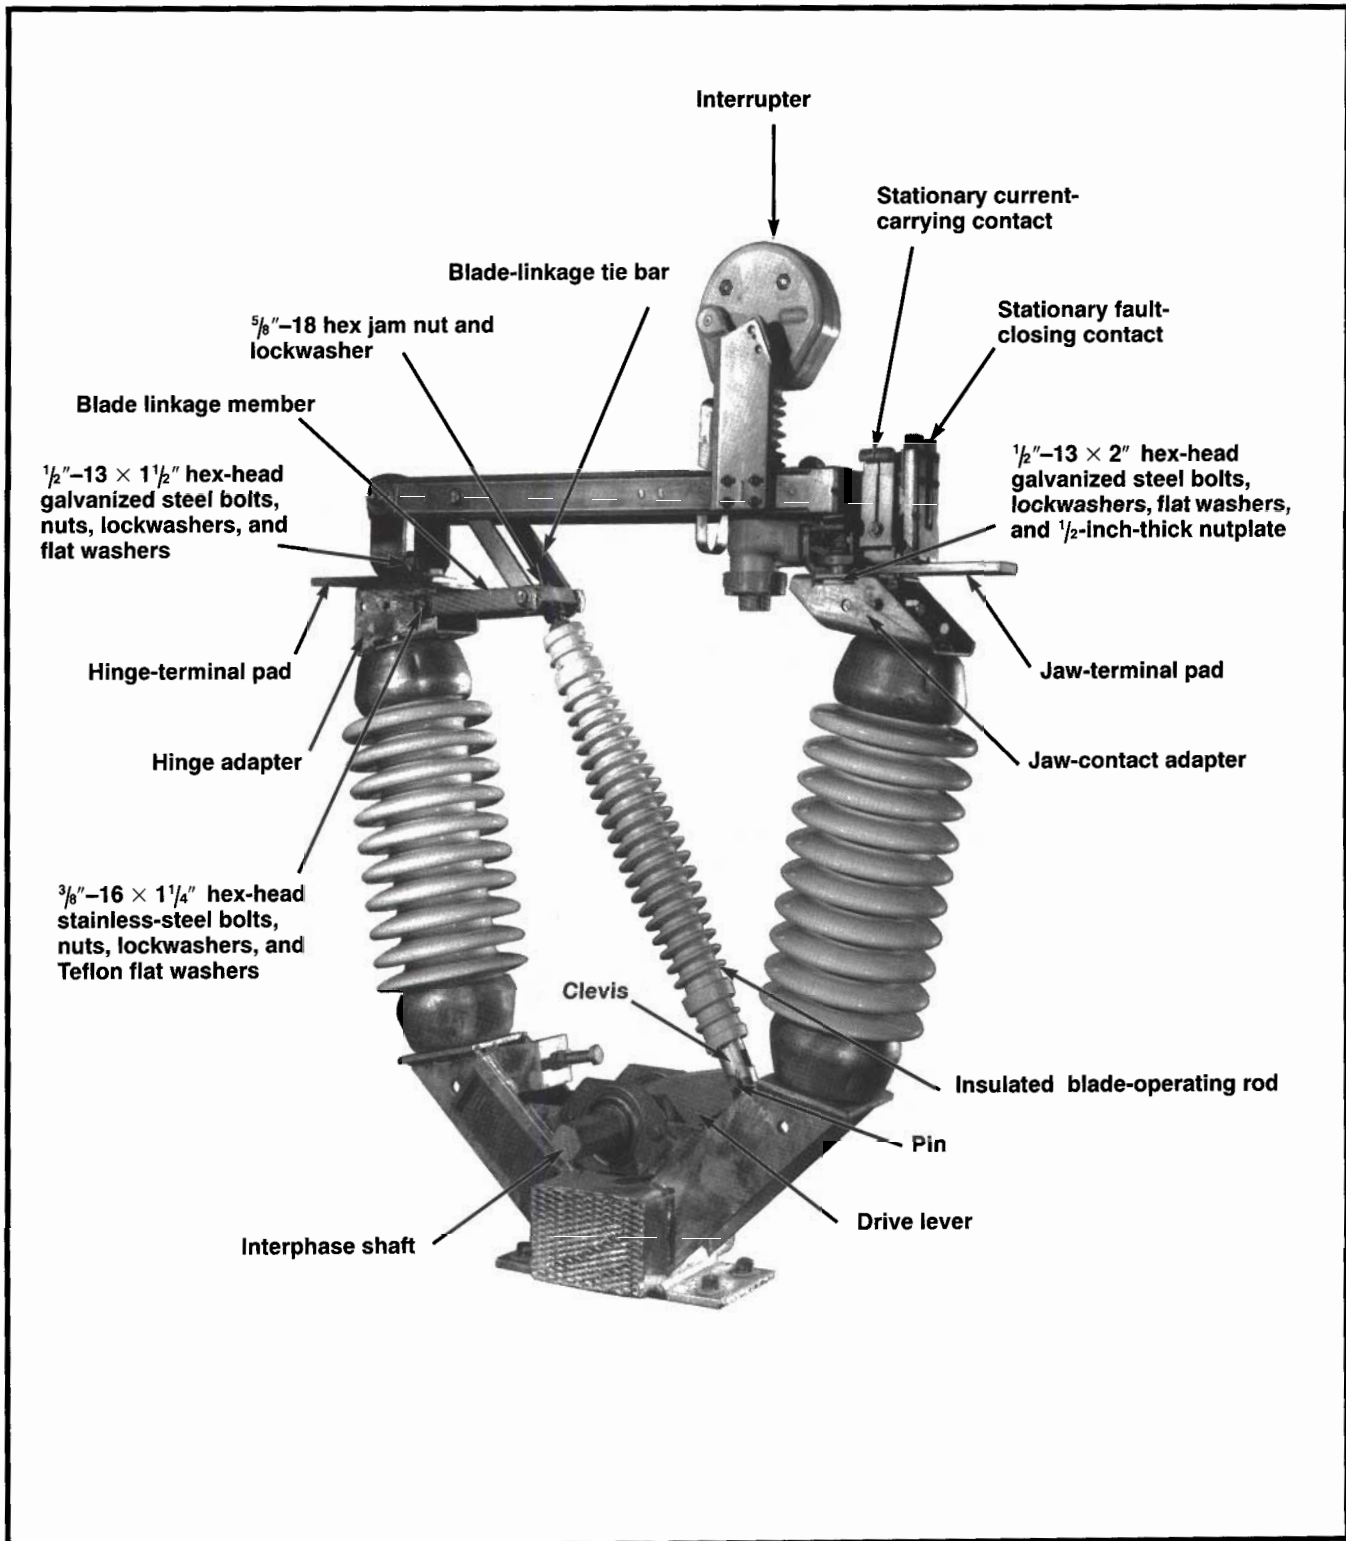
One switch pole of Three-Pole Vertical-Break Style Alduti-Rupter Switch. Typical for switches rated 25/34.5 kv and 34.5 kv, 600 amperes and 1200 amperes (600-ampere rating shown).
